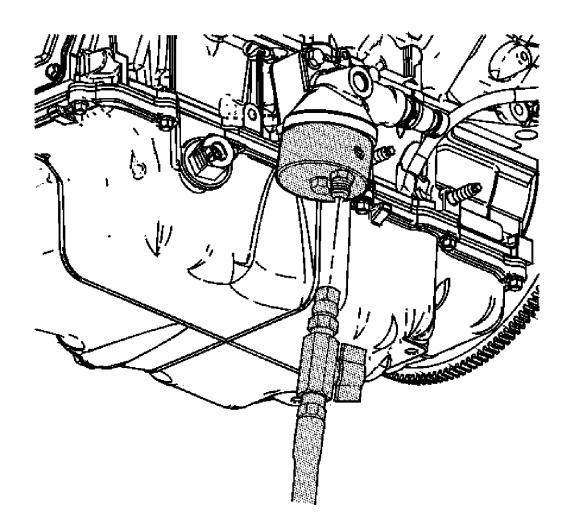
View Of J 45299 Flexible Hose Courtesy of GENERAL MOTORS CORP.
